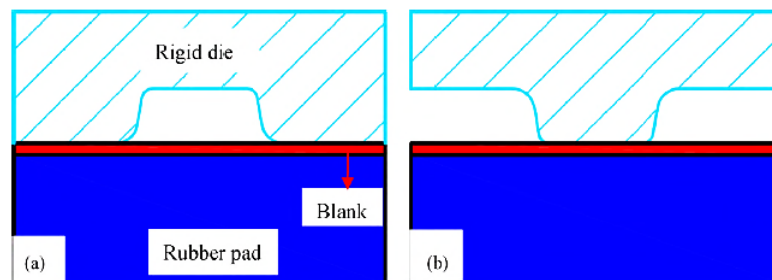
Sketch of rubber pad forming: (a) concave die style and (b) convex die style [139].
